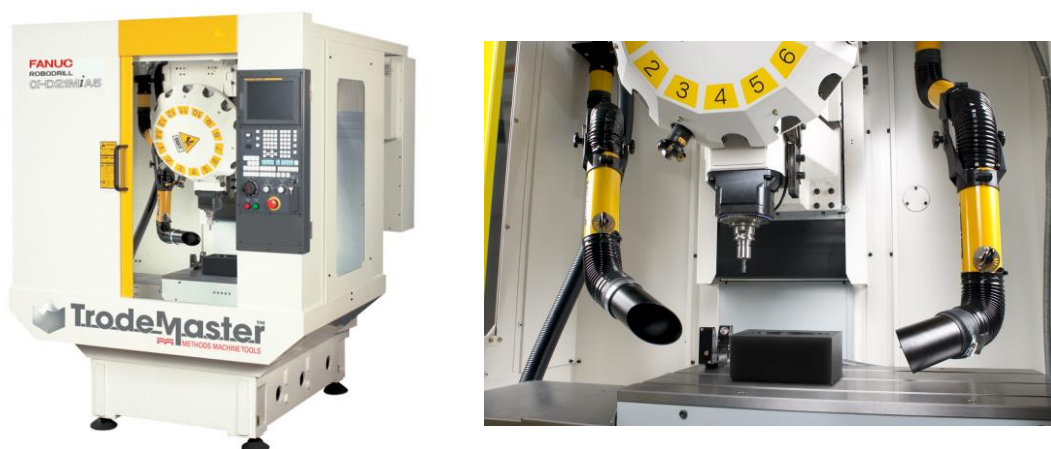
FANUC TrodeMaster graphite machining center and its dust collecting system [17,18].
